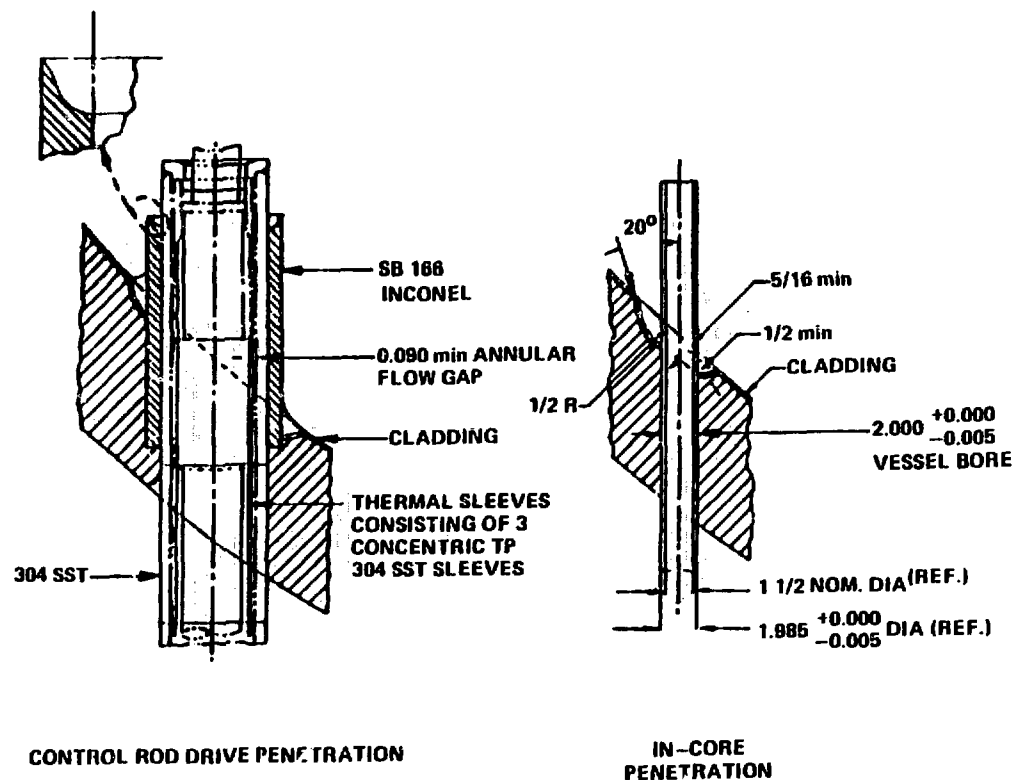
Control rod drive mechanism assembly and in-core instrument guide tube penetrations through the BWR reactor vessel bottom head. Dimensions are given in inches.
